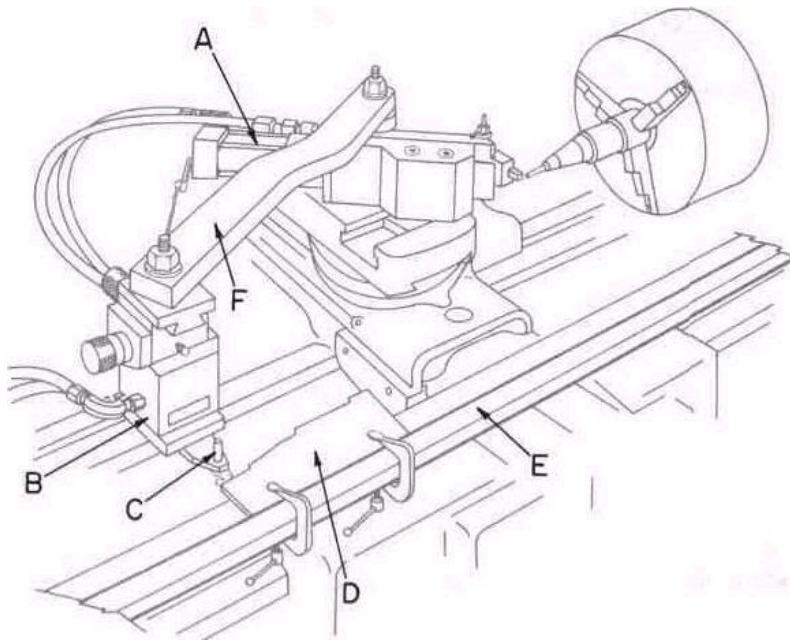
A lathe hydraulic tracer attachment. A- hydraulic cylinder; B- valve body; C- tracing stylus; D- template; E- template holder; F- arm connecting valve body with tool slide.
